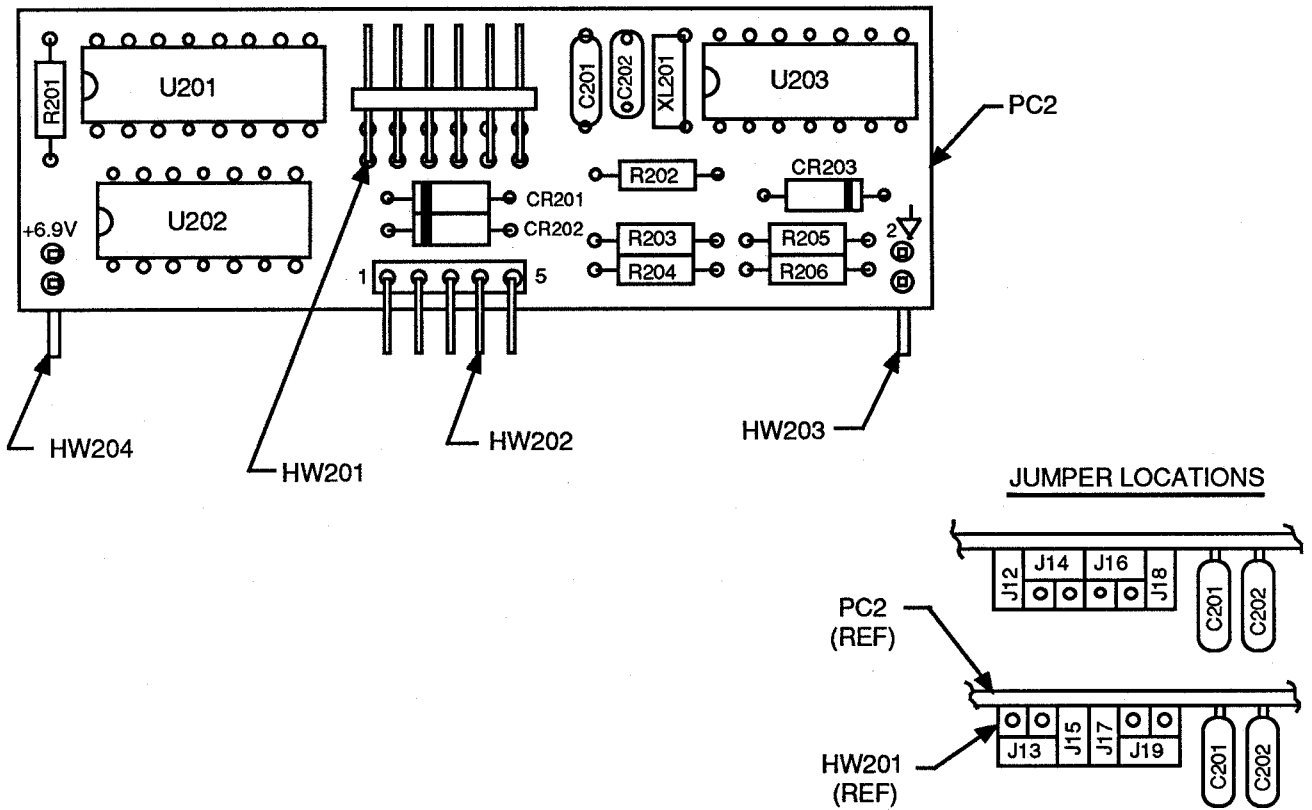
Printed Circuit Board Assembly 2 for the EP-FDX Transmitter with DIN Housing
